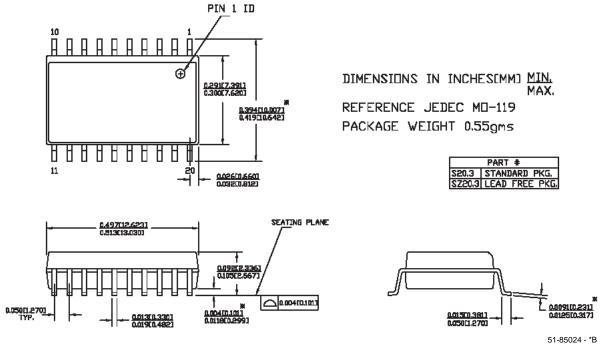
20-Lead (300-Mil) Molded SOIC
